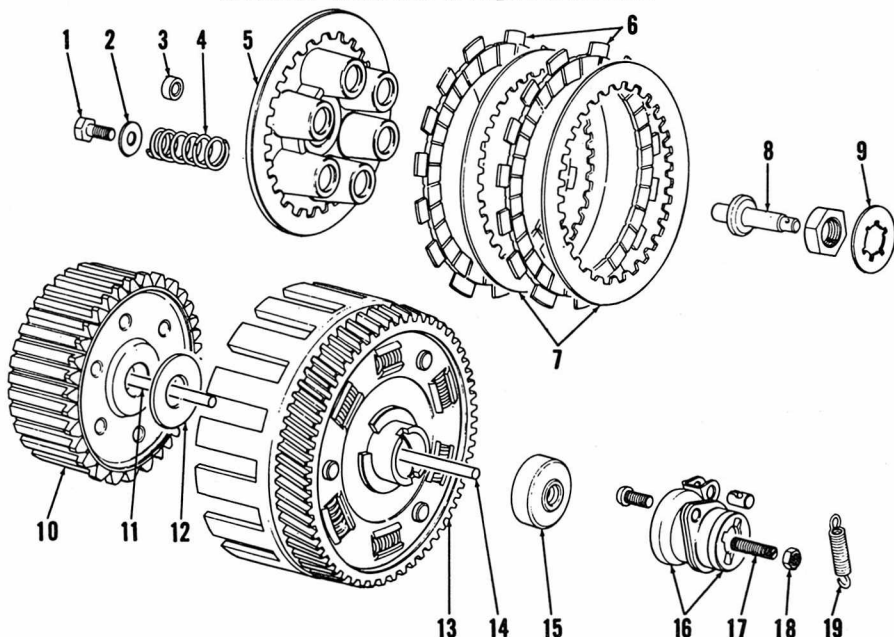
Exploded view of TS 250 R clutch assembly.
